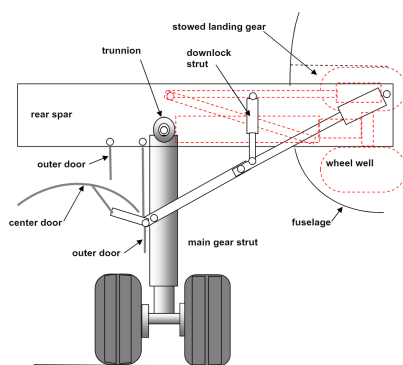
Gear retraction mechanism found on wing mounted landing gears [44]
